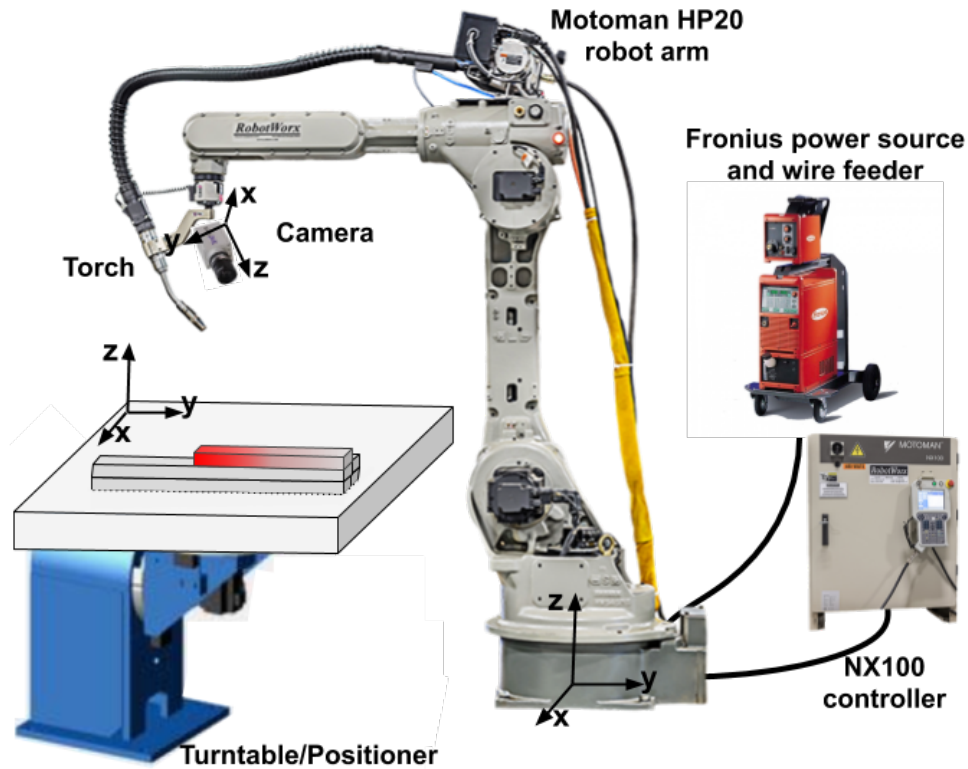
First WAAM setup configuration with Motoman HP20 robot arm, welding torch, camera, and NX100 controller [49].
